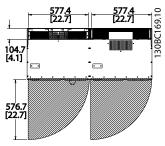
Space in front of IP21/IP54 enclosure type, frame size F9
